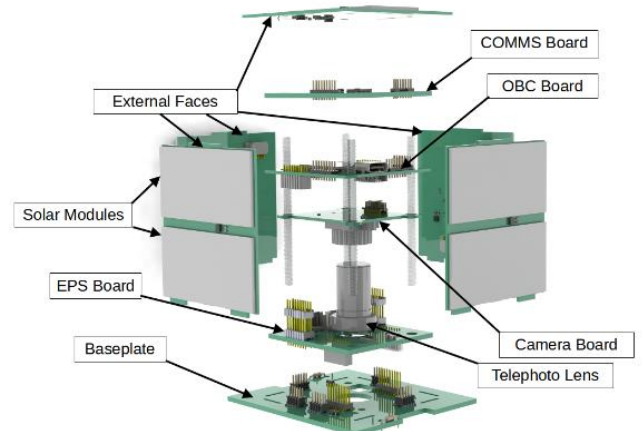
Exploded and Annotated View of Wentworth PocketQube
